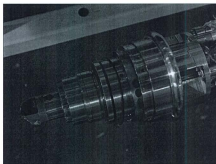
Lower pressure plate adaptor and rolling o-ring seal installed.
